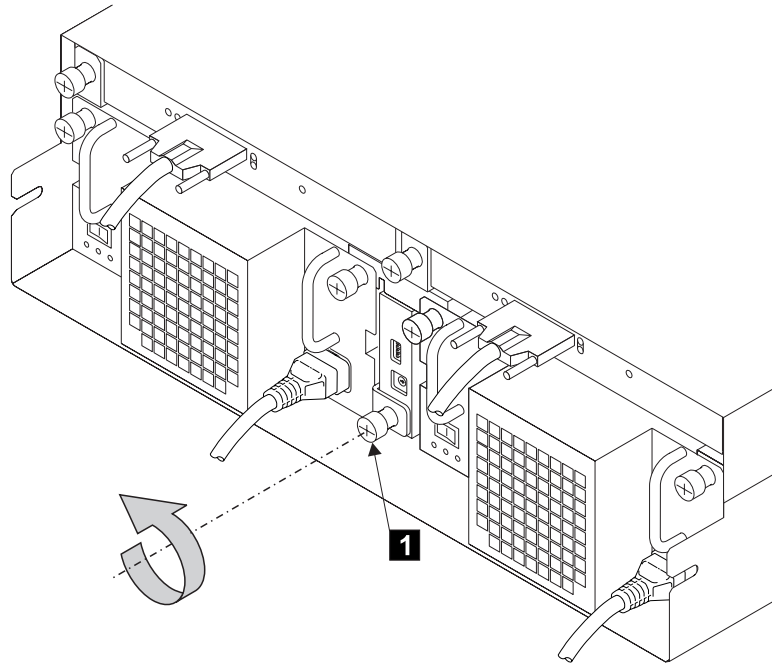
Unscrewing the Thumbscrew on the Switch Card Assembly
